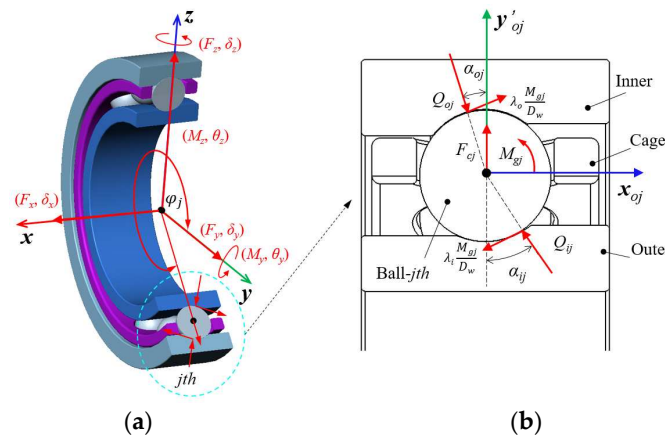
Force analysis of bearing parts. (a) Entire bearing; (b) j -th ball.
